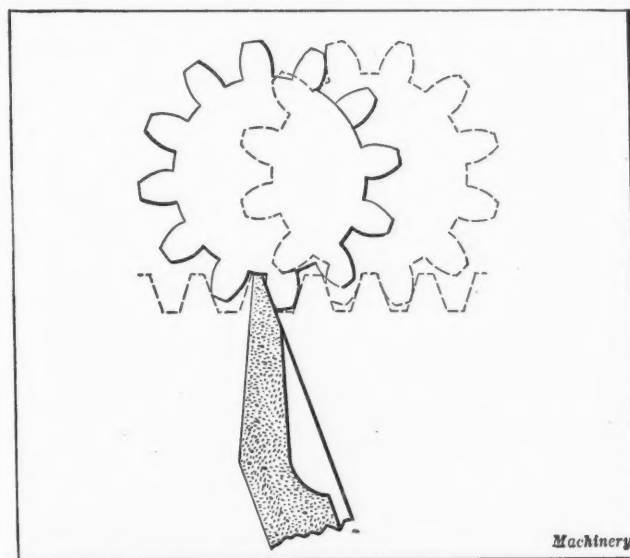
Diagram illustrating how Flat Side of Grinding Wheel generates Tooth Curves as Gear rolls along an Imaginary Rack
